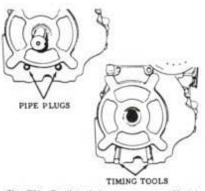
To time balancer gears on Models HH80, HH100 and HH120, remove pipe plugs and insert timing tools #670239 through crankcase cover and into timing slots in balancer gears. Refer also to Fig. T53.
